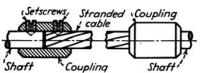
Coupling for low torques and unidirectional rotation. Inertia of rotating parts is low. This type is easily assembled and disconnected without disturbing either shaft. The cable can be encased and the length extended to allow for right-angle bends such as are used on dental drills and speedometer drives. The ends of the cable are soldered or bound with wire to prevent unraveling.
